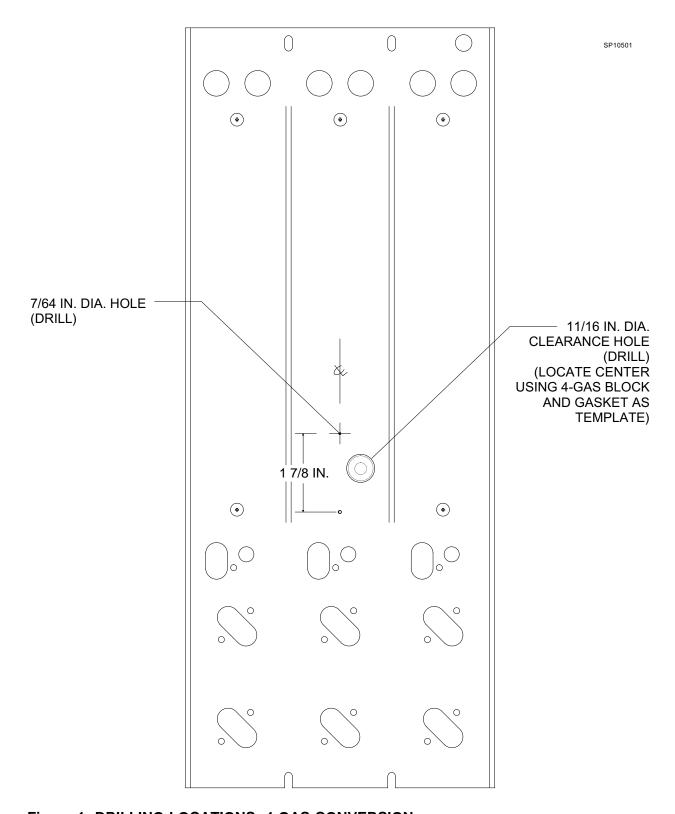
DRILLING LOCATIONS: 4-GAS CONVERSION
